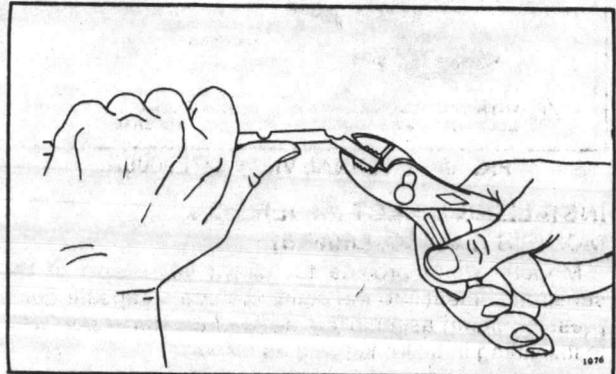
REMOVING EXCESS BULB SUPPORT.
